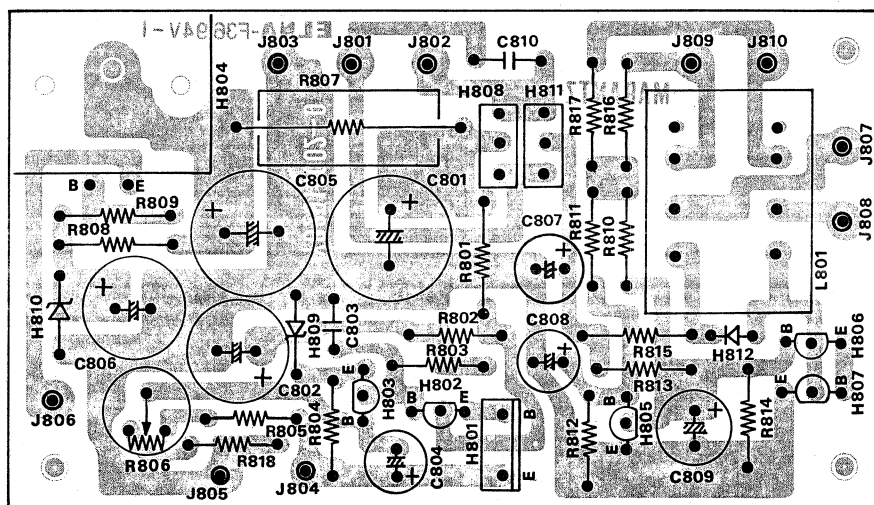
Power Supply Board – P800 Component Assembly Diagram
